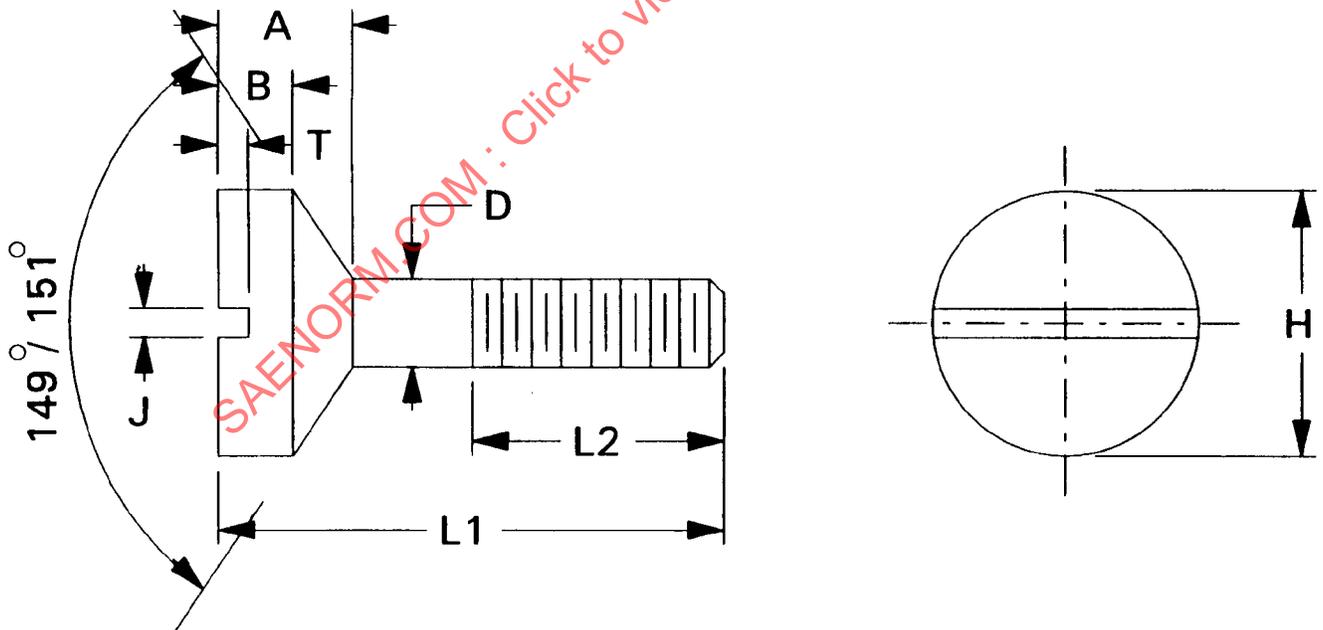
B—SLOTTED FLAT HEAD CAPSCREW FOR BRAKE BLOCKS
